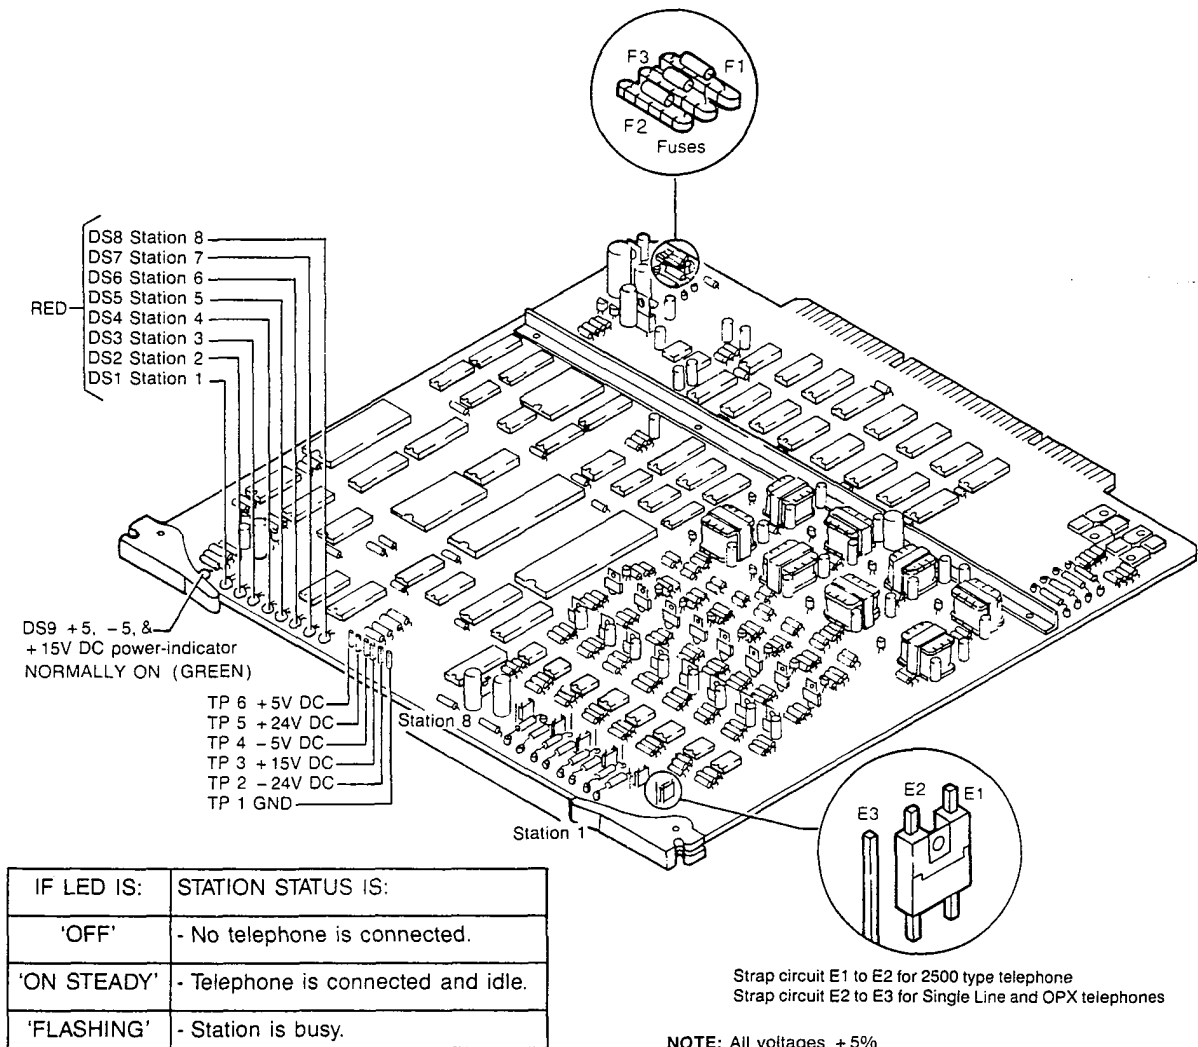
SINGLE LINE UNIT (B-8SLU-B) PCB
